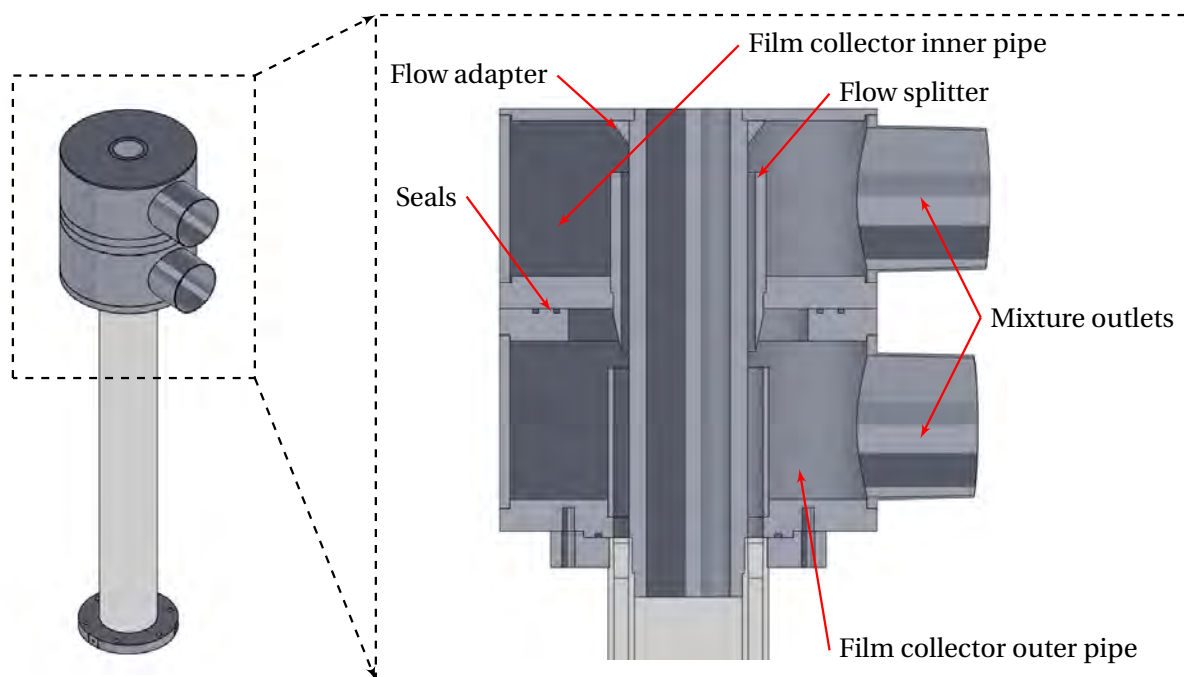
Outlet design. Left, exploded view. Right, the cross-sectional side view of the outlet with the two flow collectors.
